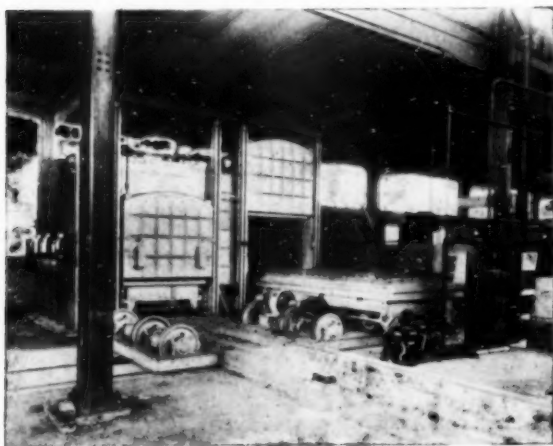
Electric Car Bottom Type Furnaces, with an empty car outside the cooling chamber. A car with charge is shown in the heating chamber.
